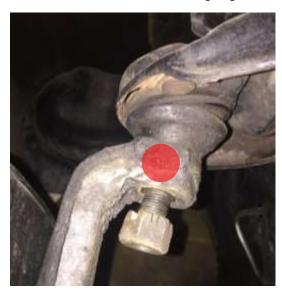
Castle nut removed and replaced upside down prior to disconnection of spindle from UCA.
